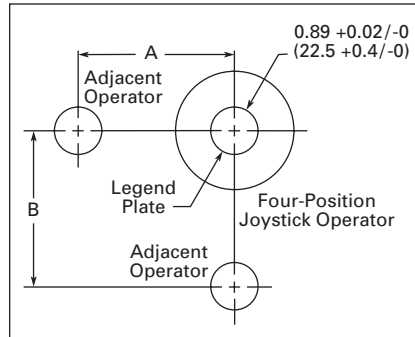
Joystick Mounting — Approximate Dimensions in Inches (mm)
